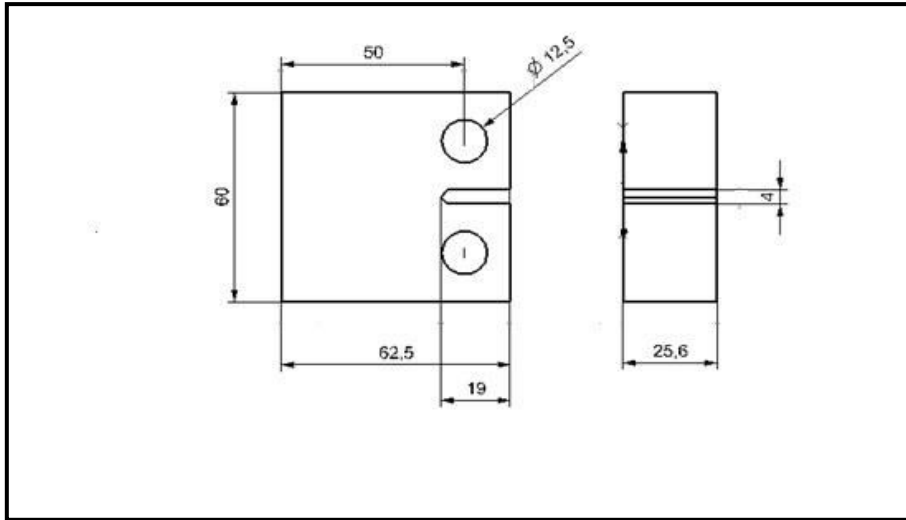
Compact tension specimen for fracture toughness test (size in mm) (ASTM E399 2013)
